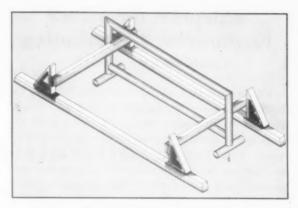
This schematic diagram shows how a tooling ways setup is used in place of a master tooling dock where it is desirable to position formers on a relatively small picture-frame.
